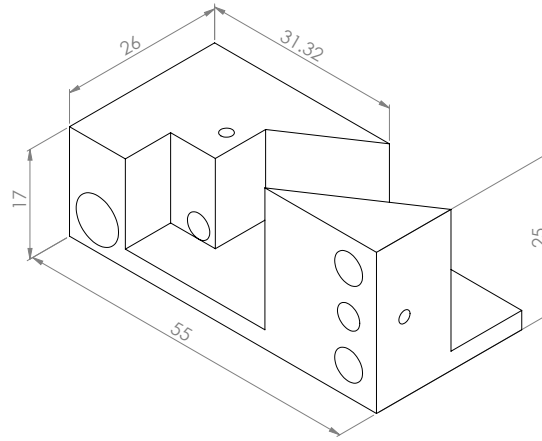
Isometric view of the grating mount. The units are in millimetres. Circles represent holes drilled in to the mount (see Appendix A for a technical drawing).
